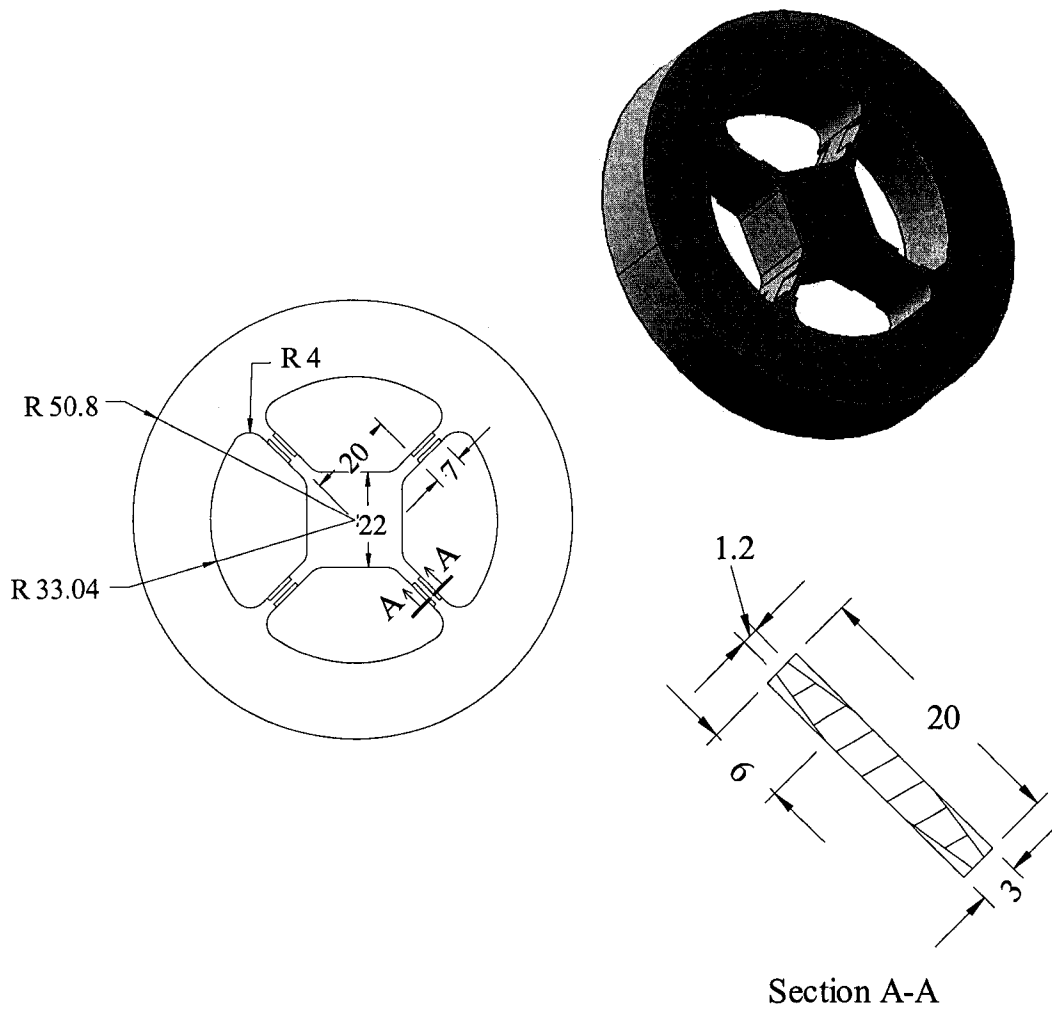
Cutting tool shape and dimensions (all dimensions are in mm)
